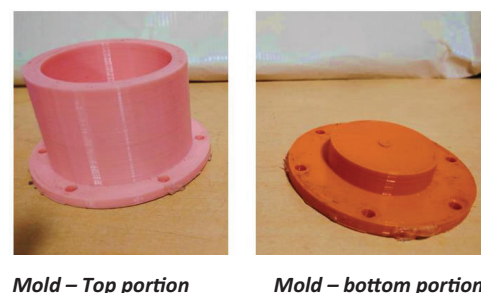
Pictorial views of the top and bottom portions of the fabricated 3D-printed mold
